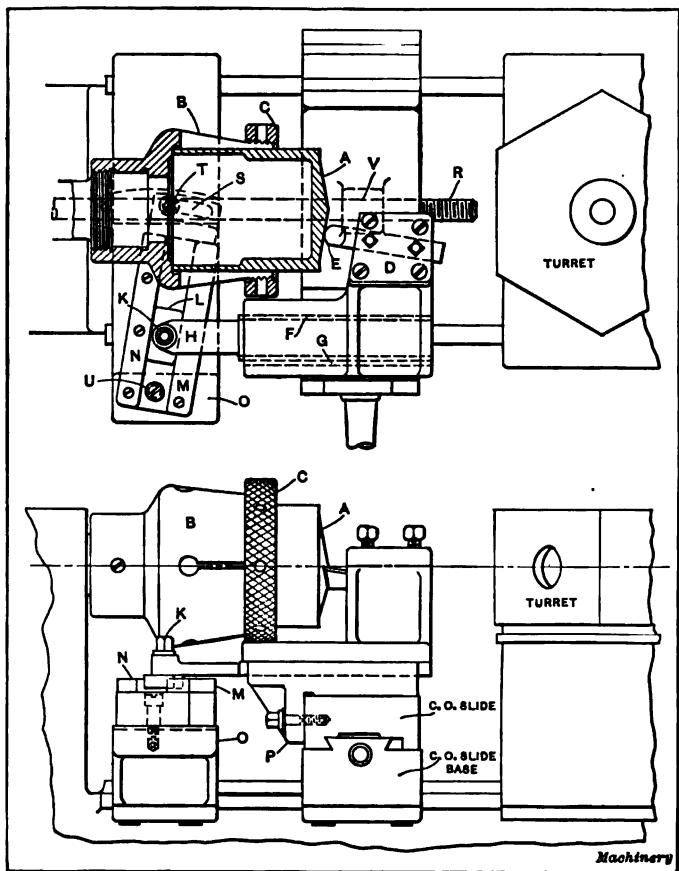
Turret Lathe Taper Attachment for machining the End of an Automobile Engine Piston
